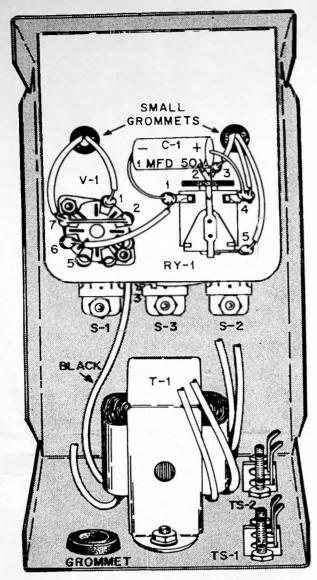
SUB-CHASSIS MOUNTING TO THE MAIN CHASSIS
